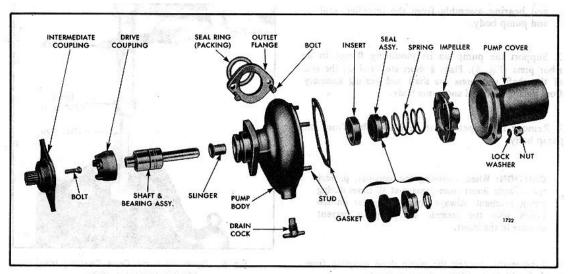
Water Pump Details and Relative Location of Parts 10-6-8
